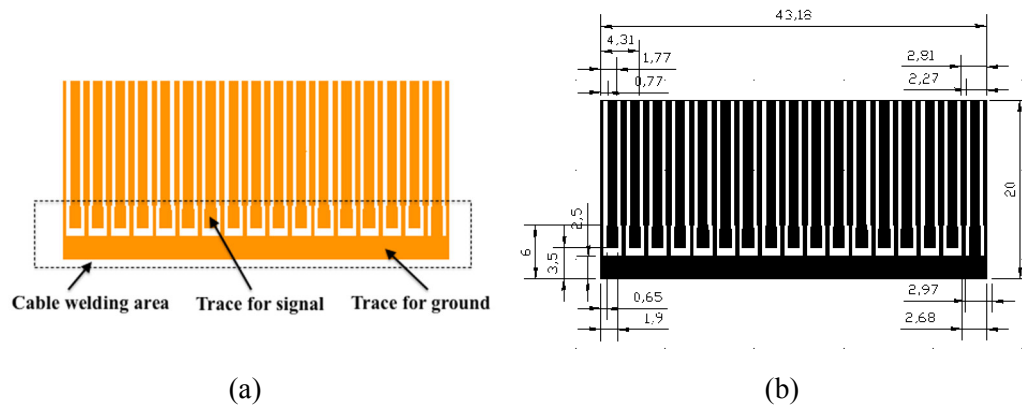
(a) schematic drawing (b) dimensioned sketch (in millimetre) of the board design for external connection
